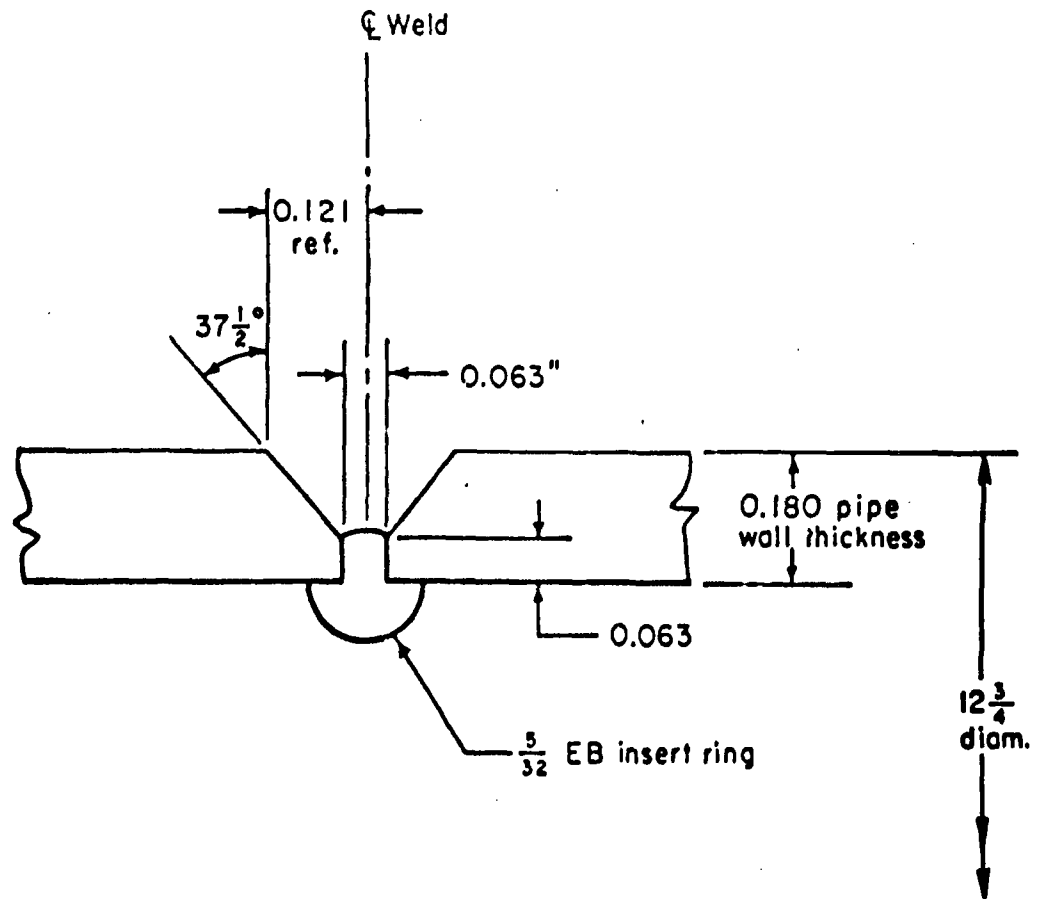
WELD JOINT GEOMETRY FOR BCL MODEL NO. 2
